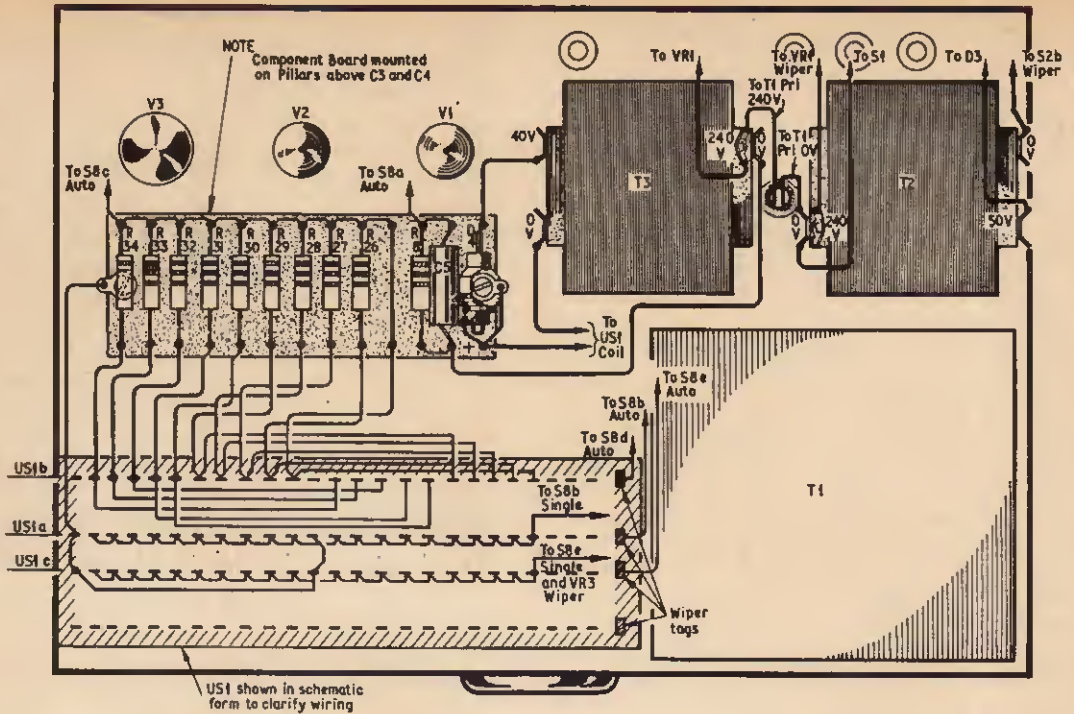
Top side wiring of the chassis. Each dash on the uniselector represents an outlet tag; the wiper is at the right hand end and coil connections underneath (not visible here). The uniselector is mounted on pillars above the chassis. C3 and C4 are underneath the group board. This drawing appears half scale
